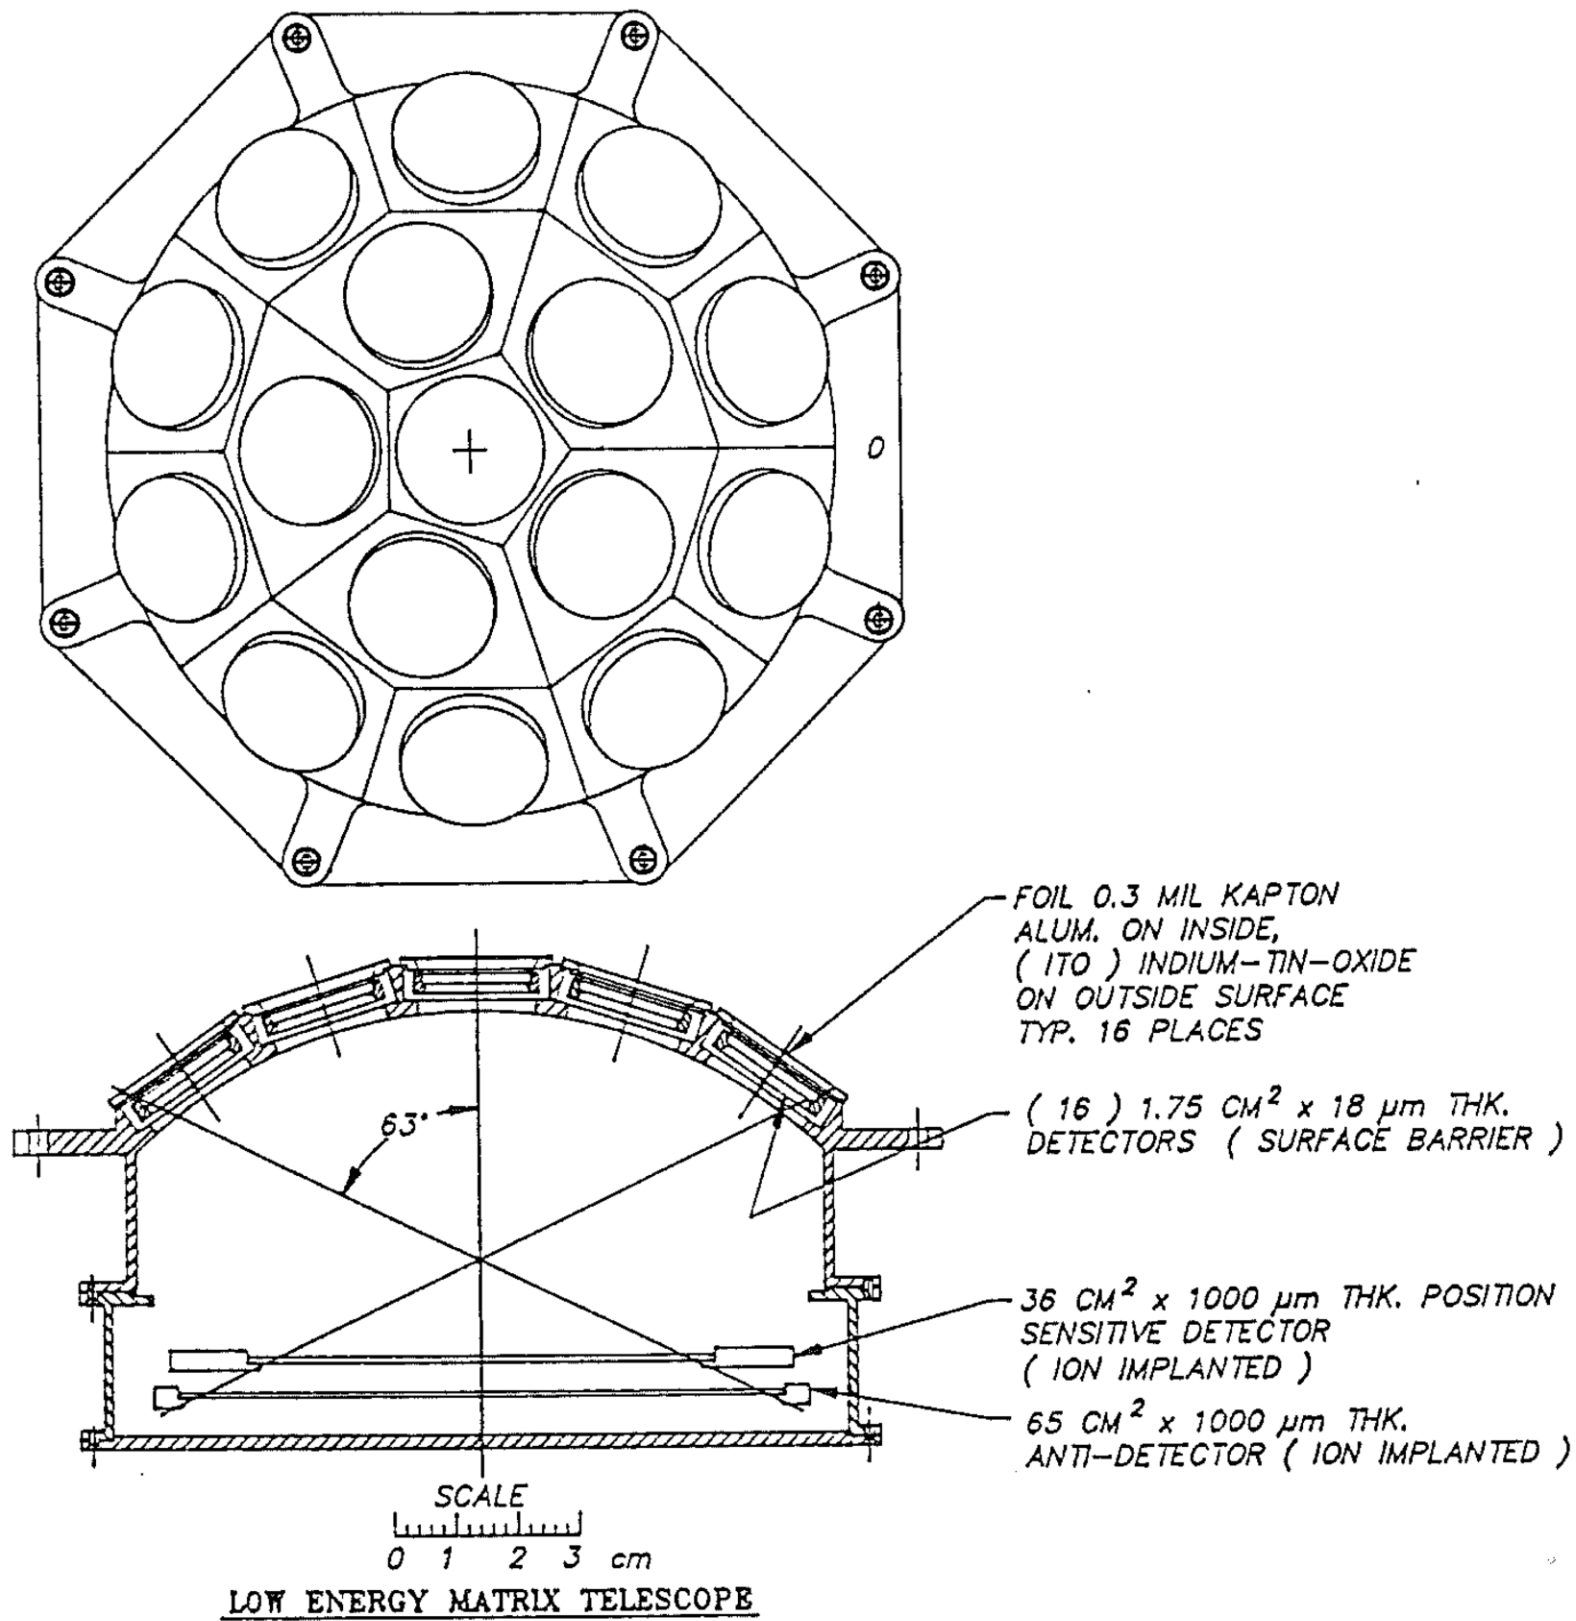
Schematic cross-section and front view of a LEMT telescope.
